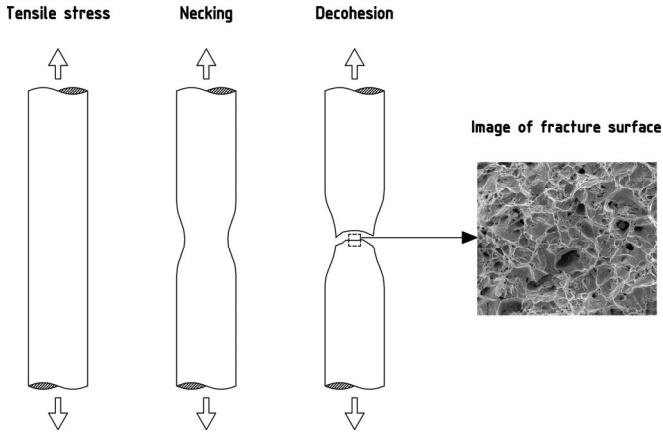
Scheme of specimen preparation for image analysis of fracture surfaces of S235JR steel
